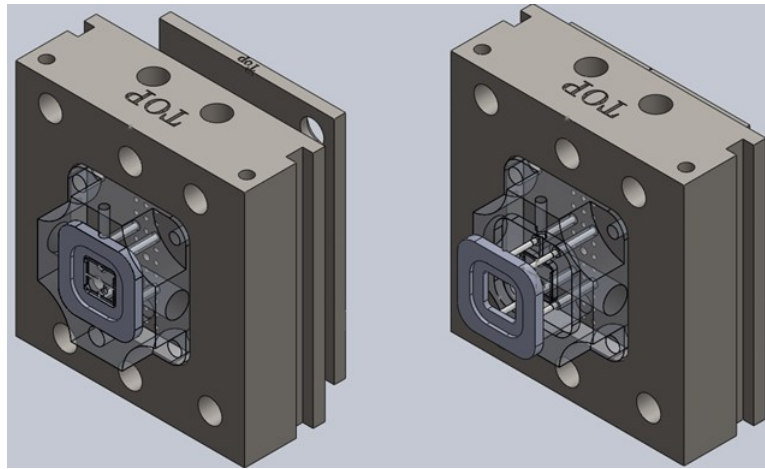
CAD representation of stripper plate assembly illustrating the movement of the stripper plate outward from the aluminum insert. Aluminum inserts is made transparent to display ejector pins.
